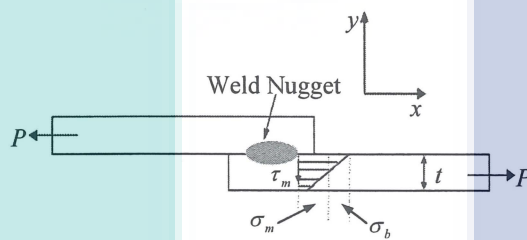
Structural stress definition at the edge of spot weld nugget.
